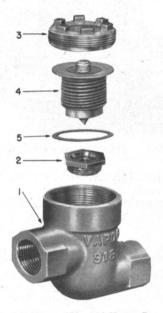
Exploded View of No. 918 Vapor Retarder.
